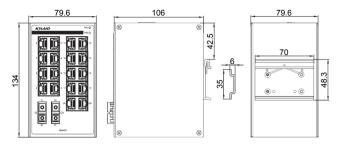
Opal20 Dimensions for DIN-Rail Mounting (unit: mm)
